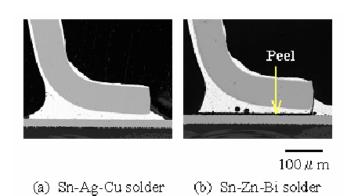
Cross-sectional BE Image of QFP Solder Joints with Sn-10Pb-plated Lead after Thermal -Vibration Test
